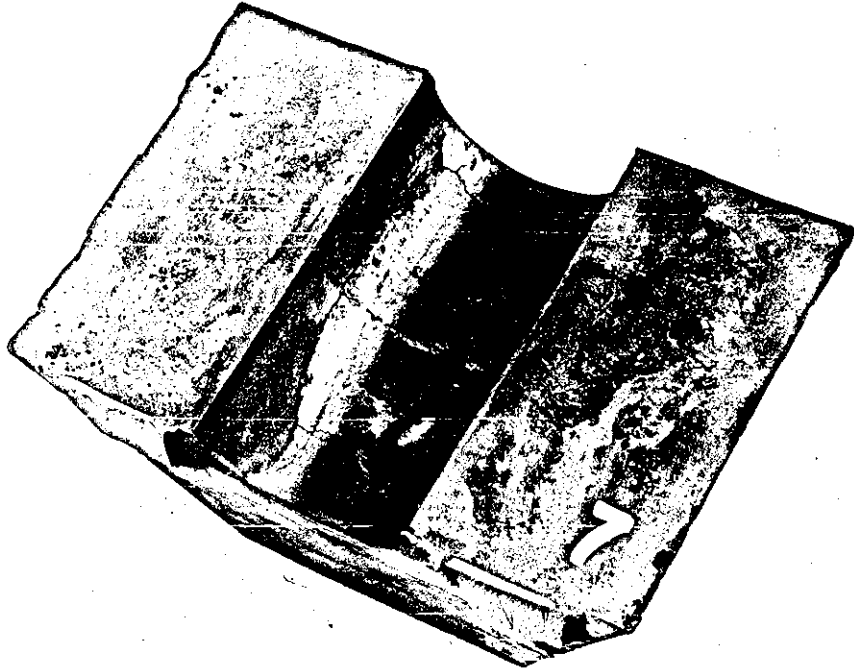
View of the as-cast surface finish of a cast iron casting showing the finning defect.
